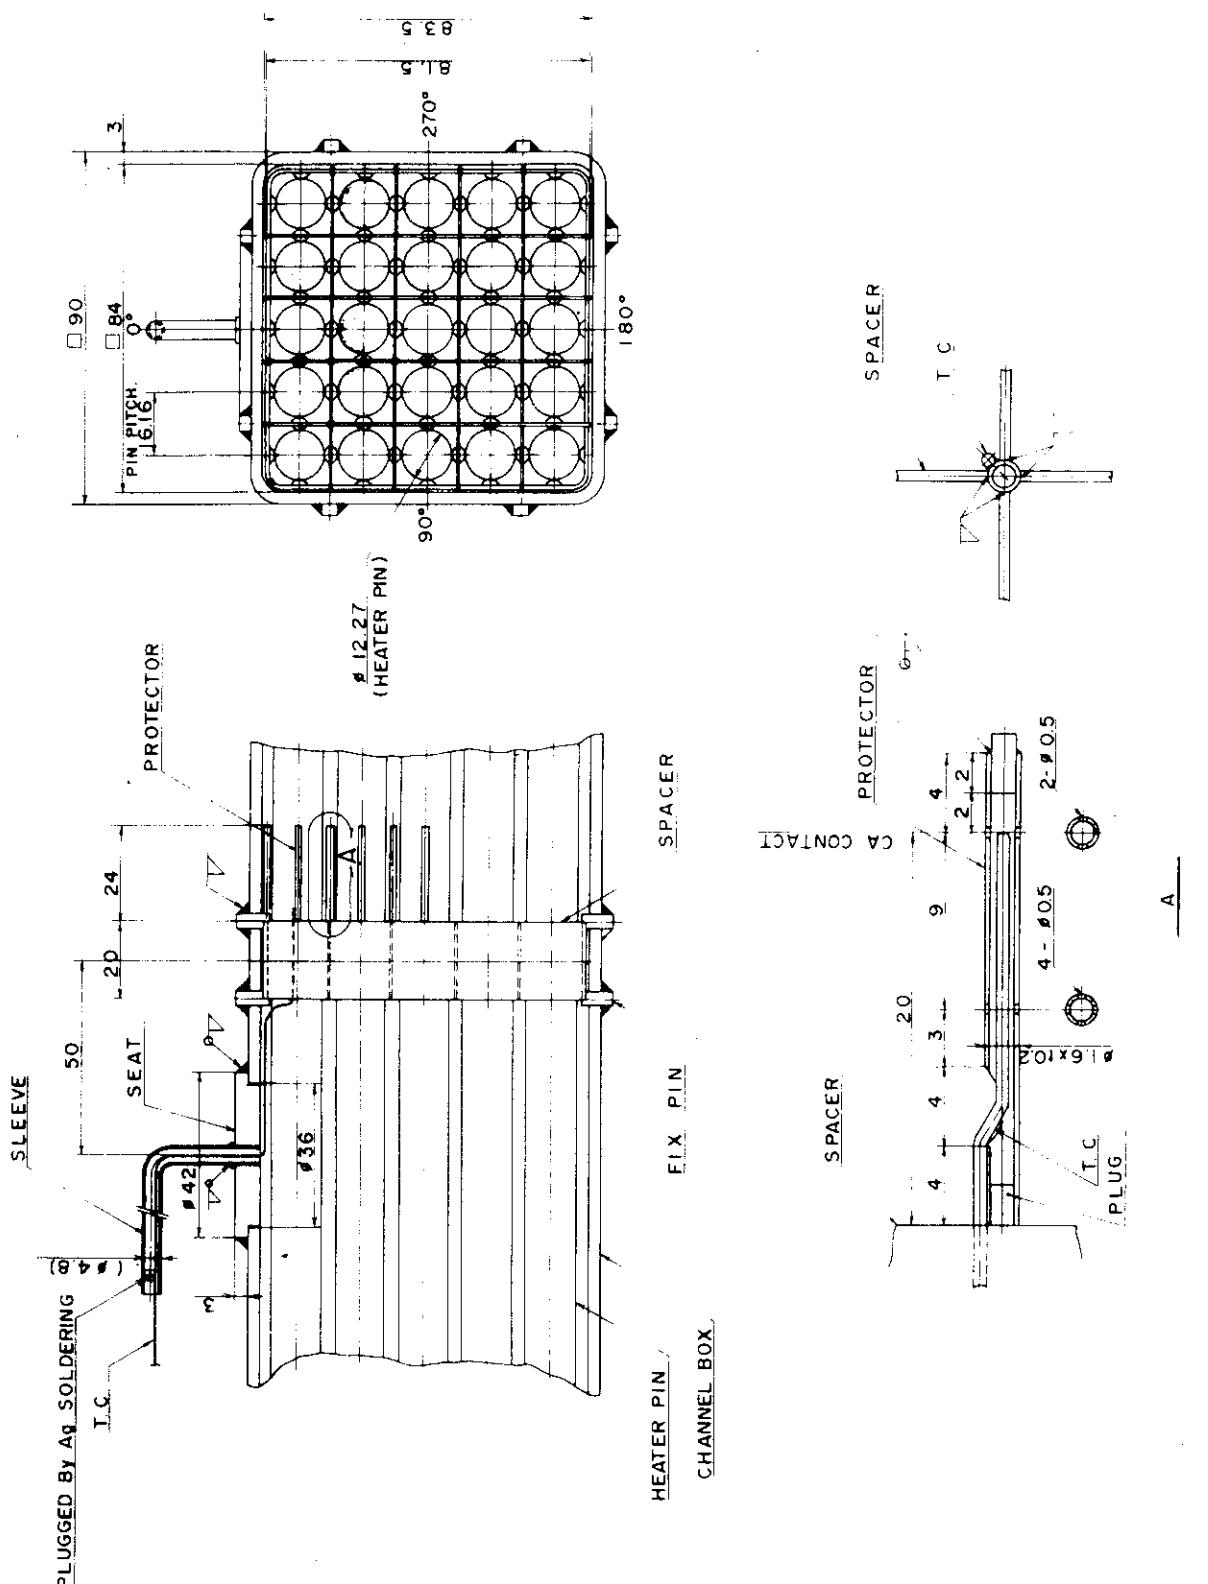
Installation of Thermocouples for Channel Box Fluid Temperature Measurement
